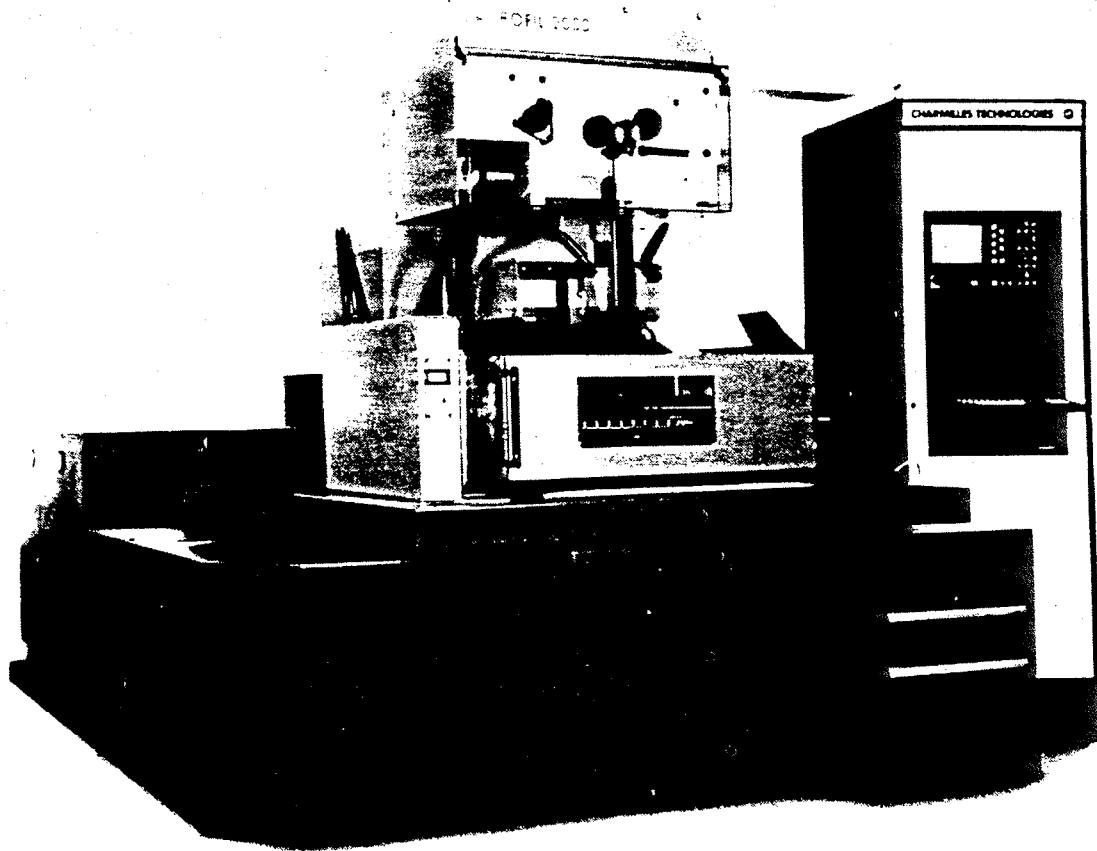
The New "Intelligent" Robofil 2000 EDM wire cutting machining center.
